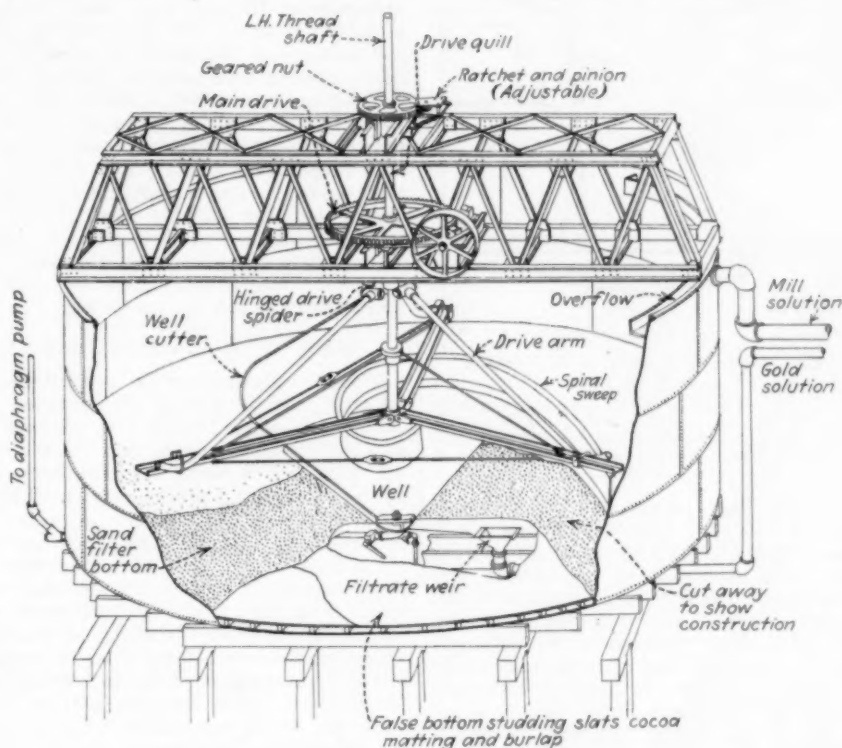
Outline Drawing of Hardinge "Superthickener"
